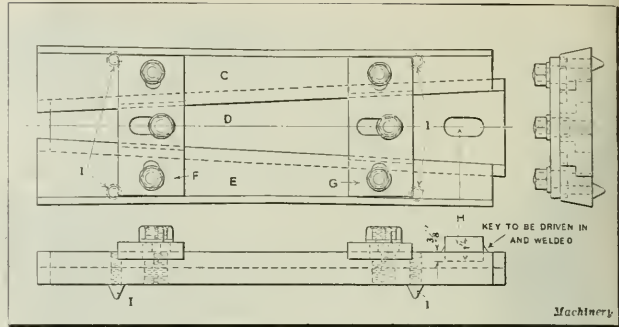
Fixture used for casting Brass on Shoe and Wedge Faces of Driving-boxes.
